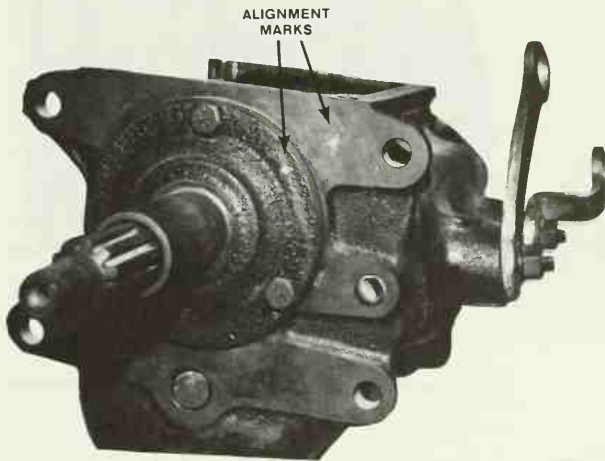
Punch marks are made on the front bearing cup to help in alignment on reassembly.
